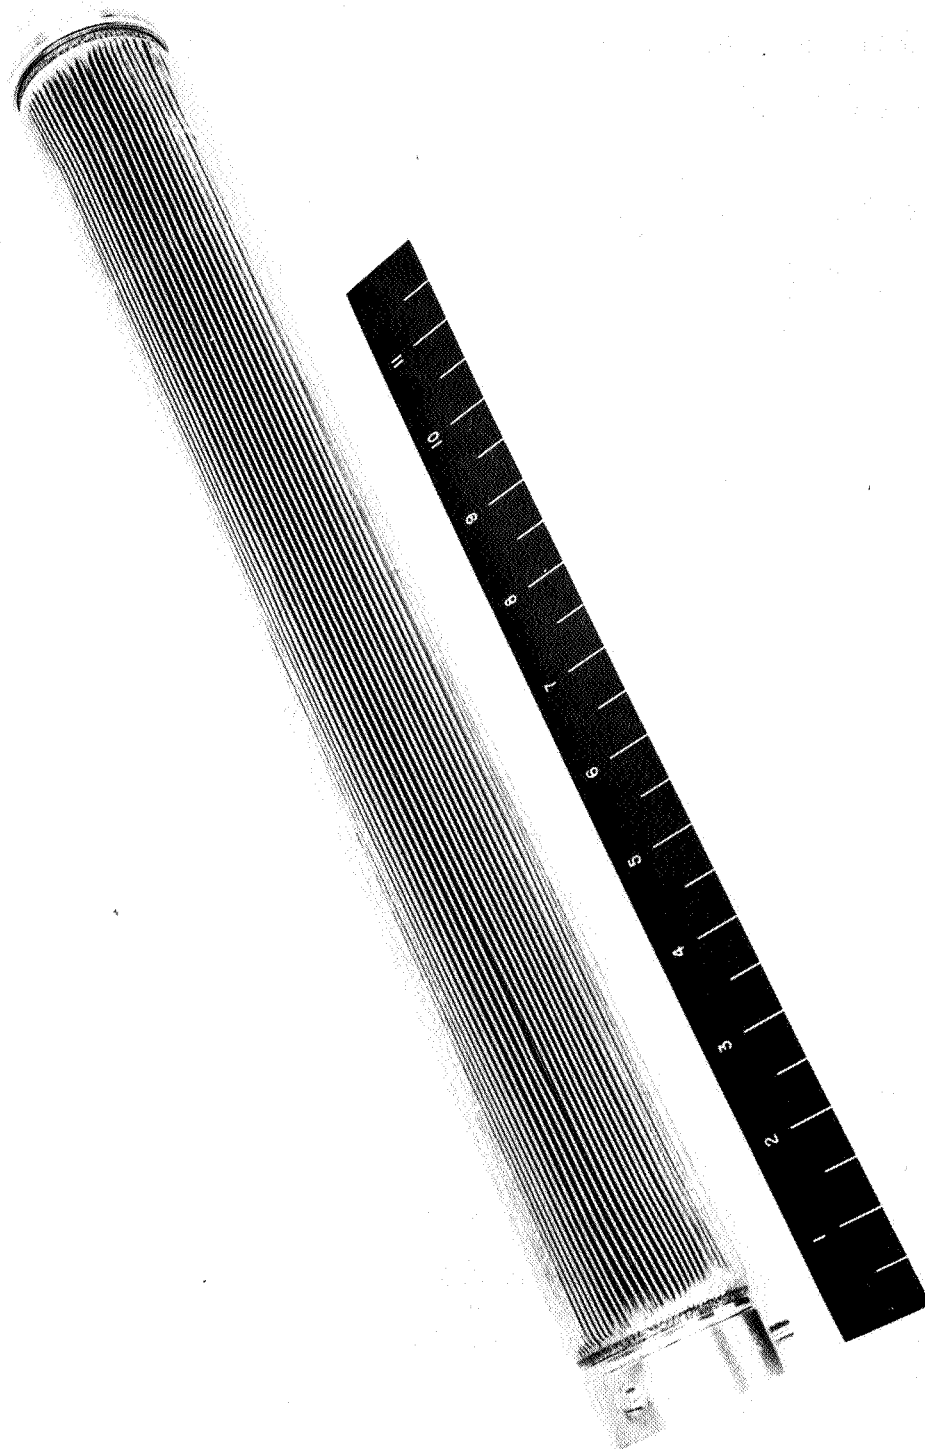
ELECTRON-BEAM WELDED STAINLESS STEEL FILTER ASSEMBLY
